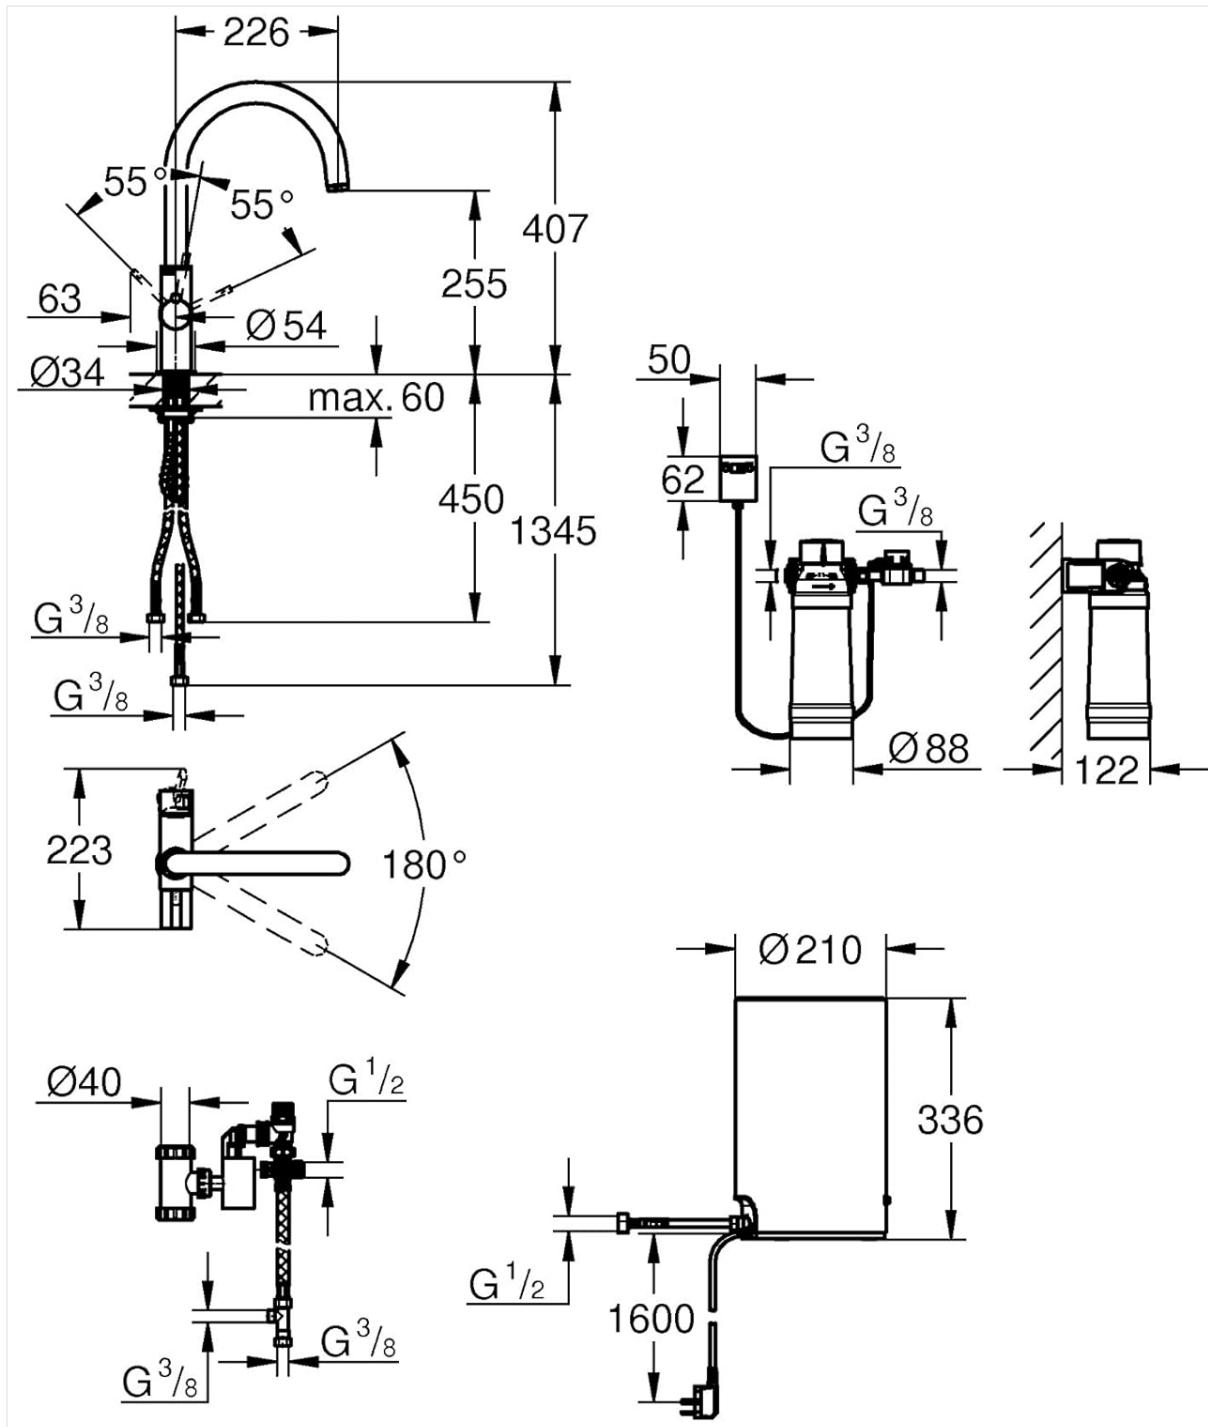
Technical drawing illustrating the dimensions and connection points for the GROHE Red faucet, filter, and boiler components. This diagram provides critical measurements for installation planning.
